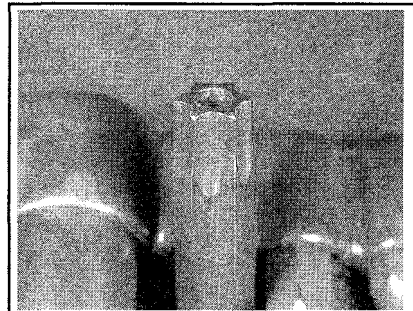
and tamper resistant drivers are required to remove special fasteners
